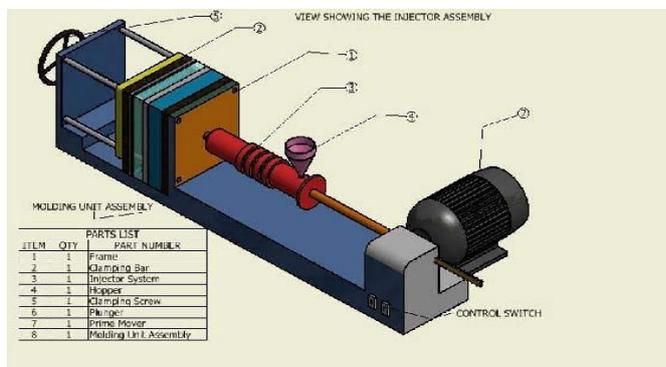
The Plan View of the Injection Moulding Machine for Polymer Composite.
